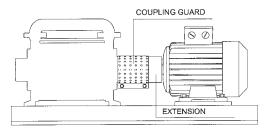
CHECKING ALIGNMENT ON BASE MOUNTED PUMP DESIGN
